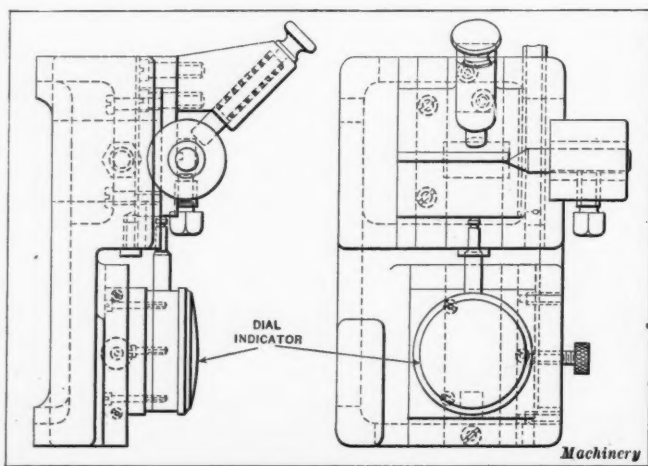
Fixture for testing Lead of Opening Die Chasers
